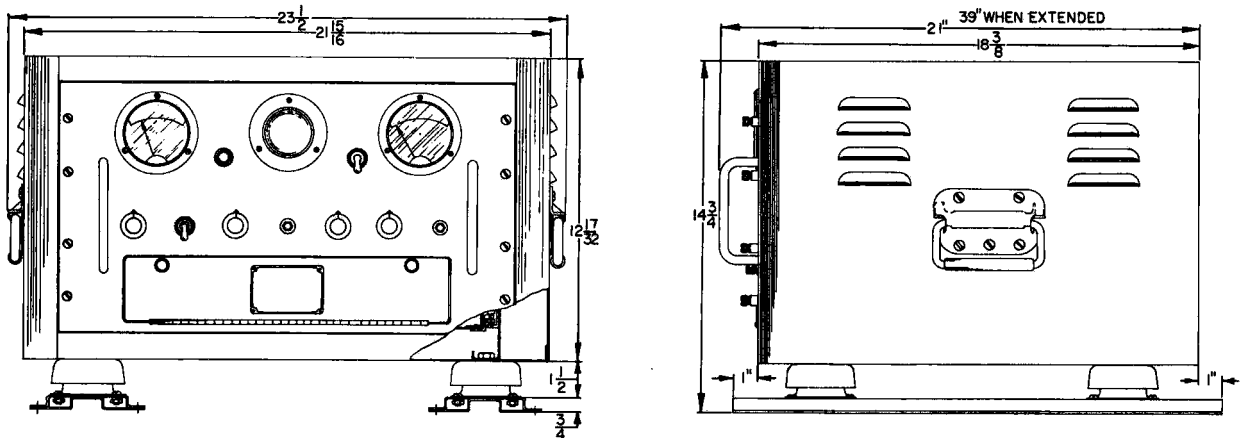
1. Front and Side Views of the Equipment, with Dimensions
